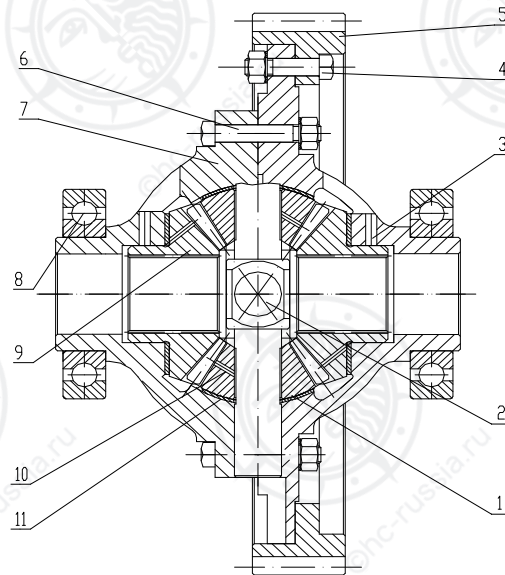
2.0t-3.8t Differential assembly structure drawing
